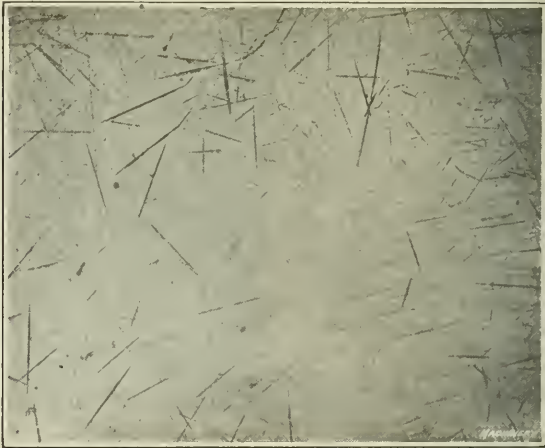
Highly Magnified Surface of Polished Ball, showing that under Best Conditions Surface is covered with Multitude of Scratches
